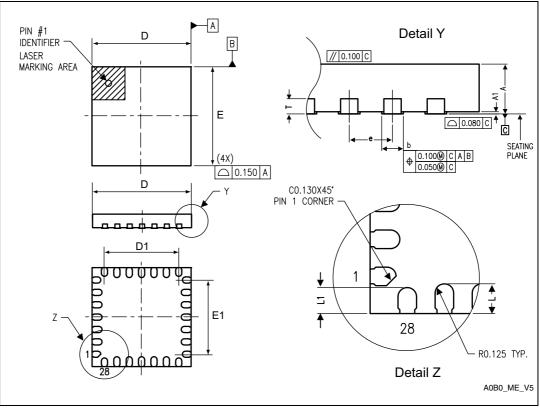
UFQPN28, 4 x 4 mm, 28-pin package outline
